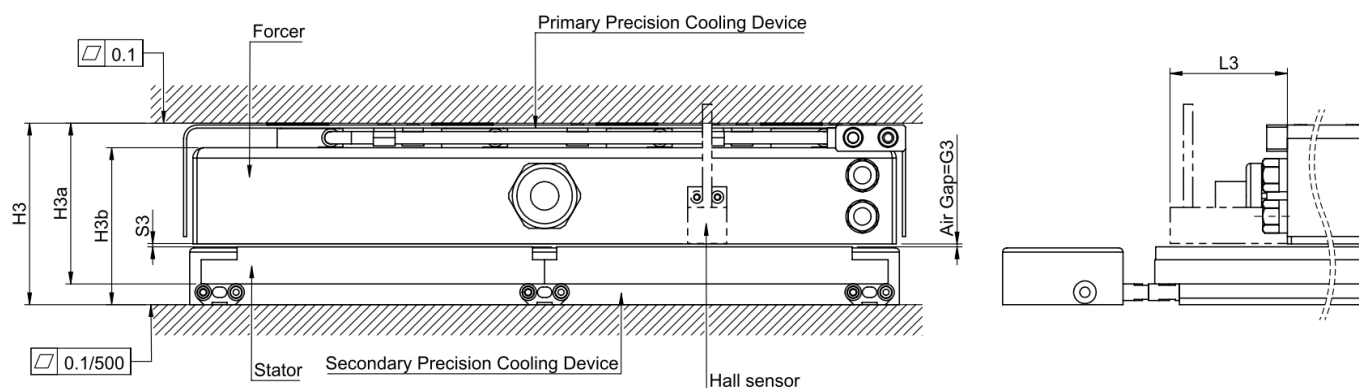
LMFA precision water-cooling linear motor assembly
